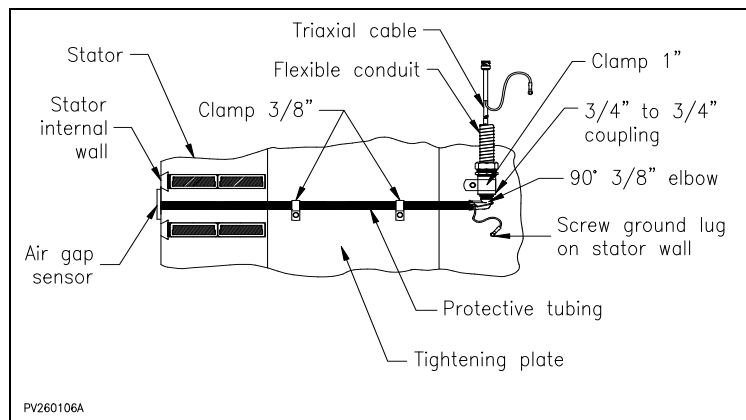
Holding down protective tubing and elbow assembly with clamps
